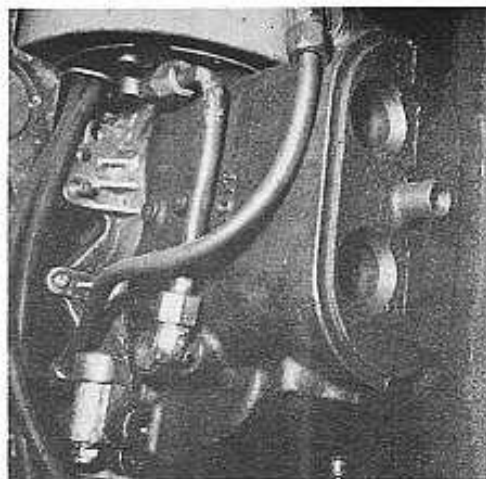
Johnson DT-39; the cylinder is cast iron with cylinder head cast in one piece
